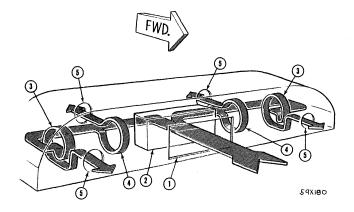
Air Conditioning Unit Air Flow (Roof Unit)
